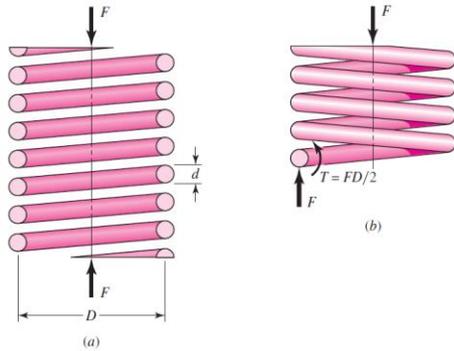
(a)Axial load on helical spring and (b) Direct stress and torsional stress on helical spring
